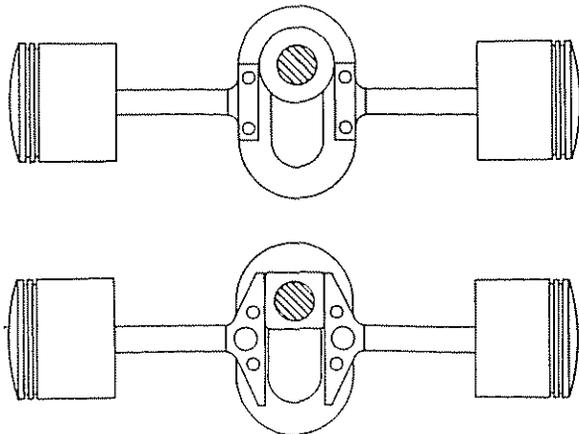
Yoke roller (top) and yoke slider block designs utilizing similarly configured reciprocating assemblies
